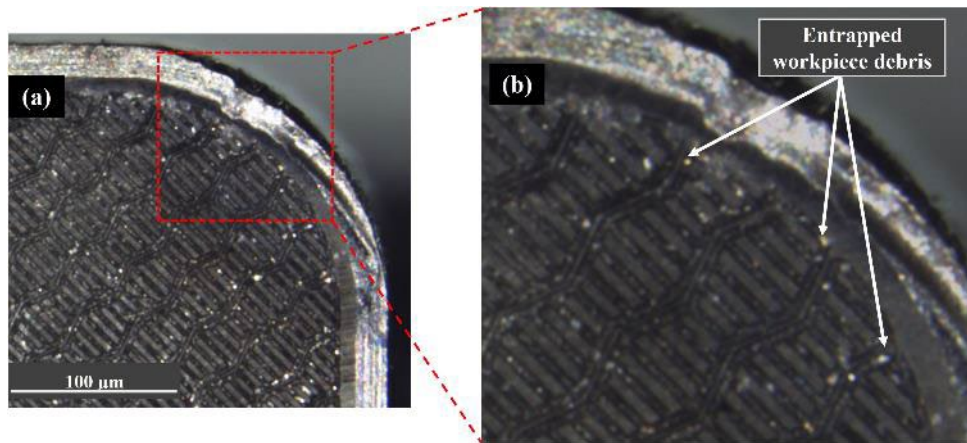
Illustration of entrapped workpiece debris (bright contrast spots) on the shark skin surface layer of the rake face of T1ML-S1 cutting insert
